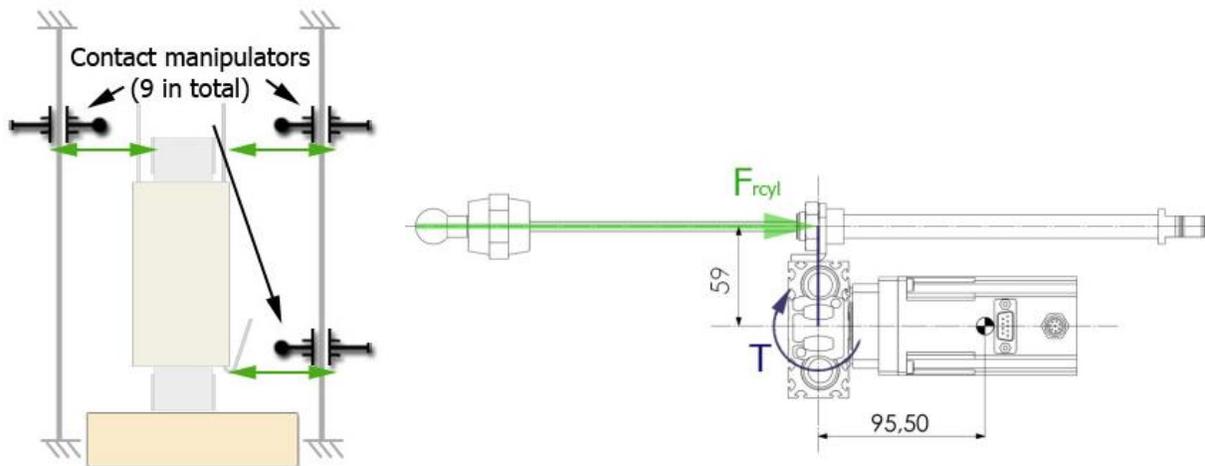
Contact manipulator concept (on the left) and technical drawing (on the right)
